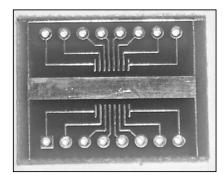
Surface mount ICs can be mounted to general-purpose carrier boards, then attached as a sub-module to the base board of the homebrew project.
